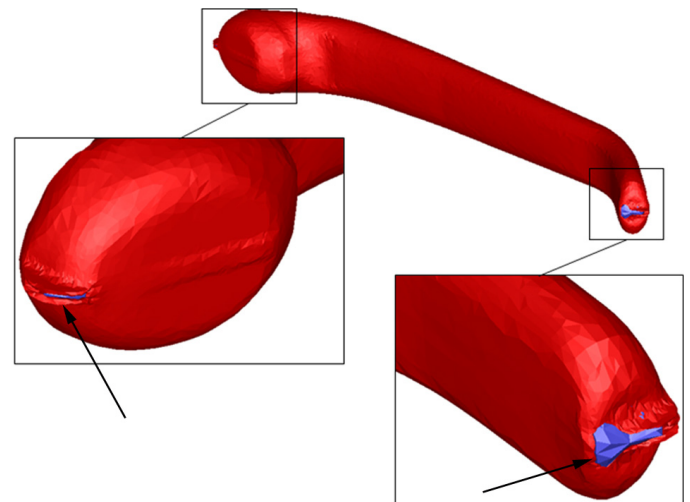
A view of the Mg/Al bimetallic forging after the process of die forging in the final impression
